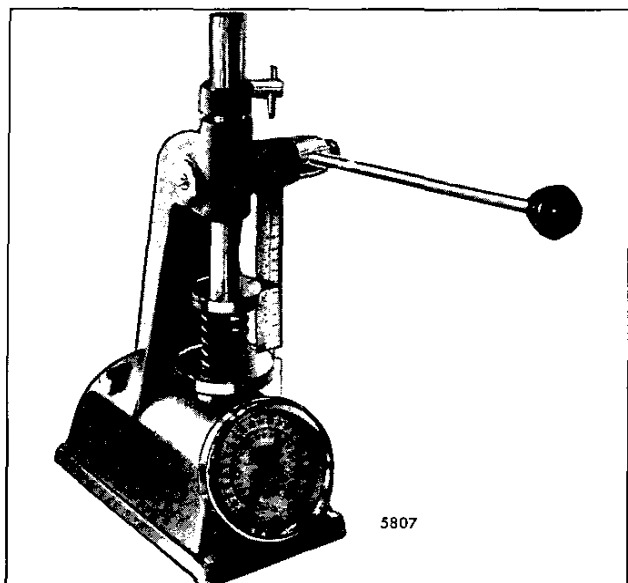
Testing Valve Spring Using Tool J 22738-02
